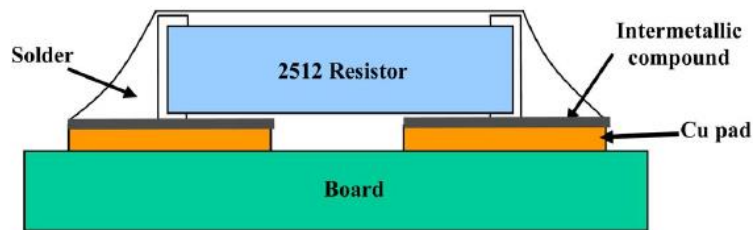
Schematic of cross-sectional view of resistor assembly.
